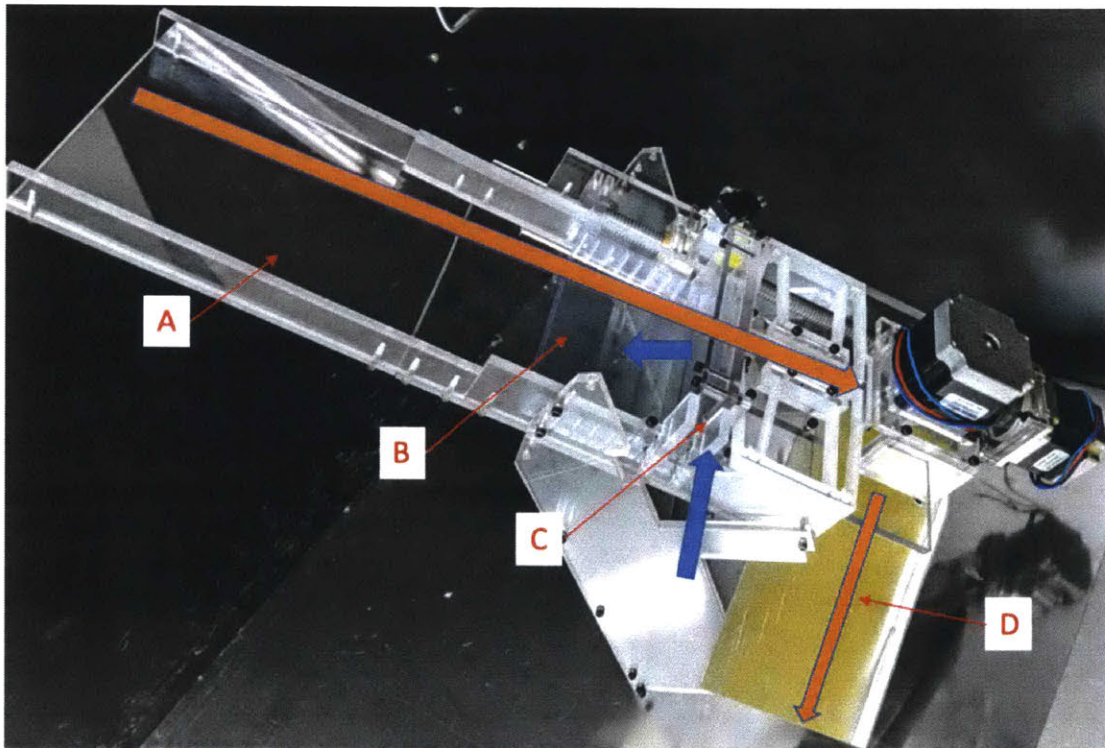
Third stage of the automated packaging machine, vial placement mechanism.
